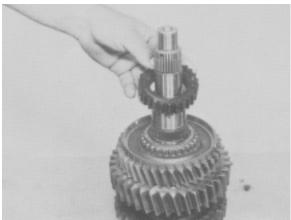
Remove 2md & 3rd shift hub sleeve.
